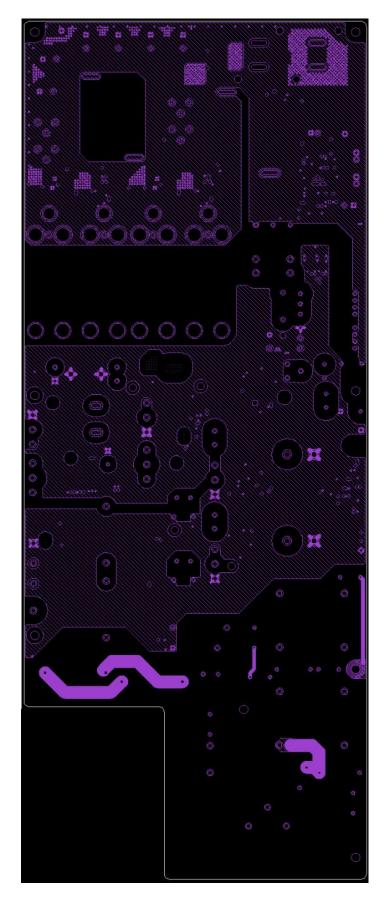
shows the layout of Layer6 of the PCB of this power supply.
